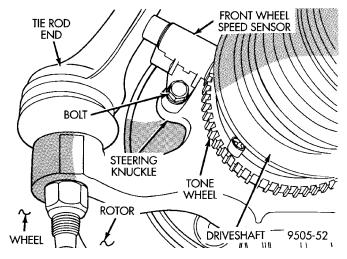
Front Wheel Speed Sensor Attaching Bolt
